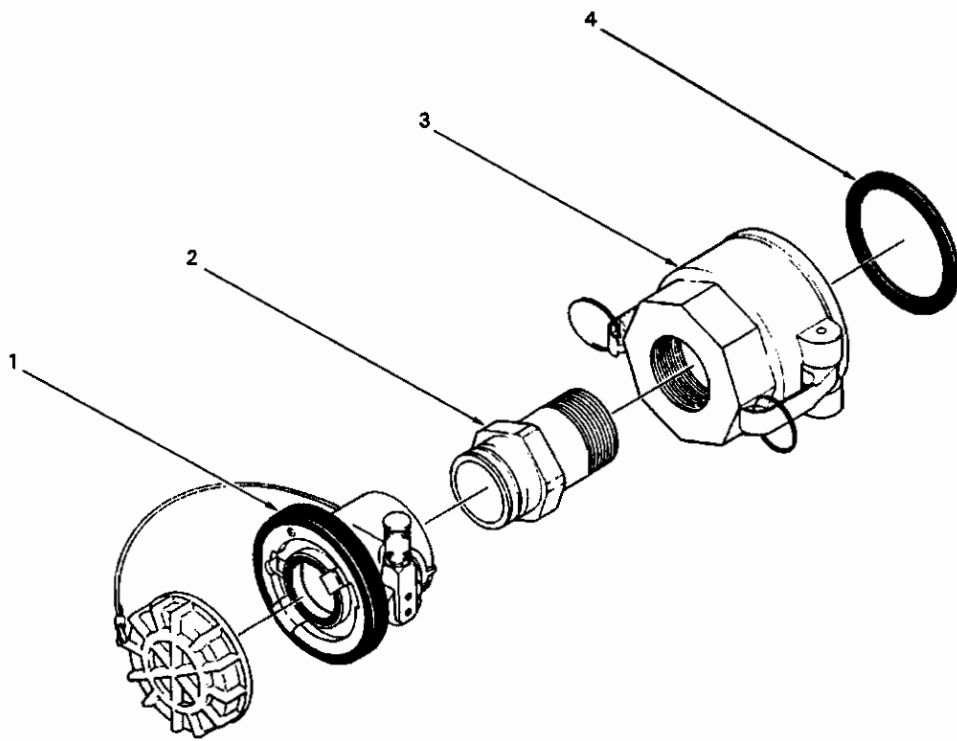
2-Inch Unisex to 3-Inch Female Camlock Adapter
